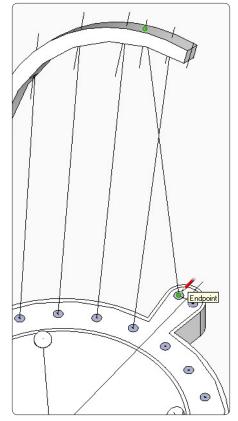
Draw centerlines connecting the guide points on the spindle sockets with the spindle hole centers on the top of the bow.
